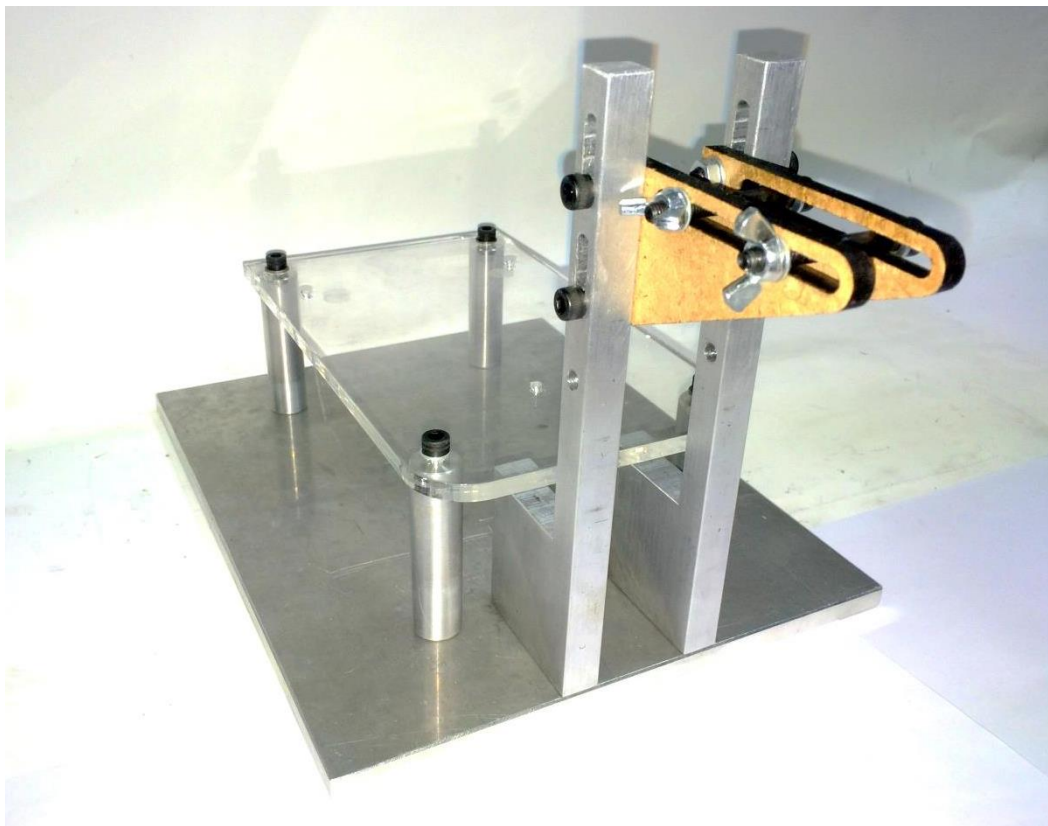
The actual robot stand and the holding fixture for Link 2
